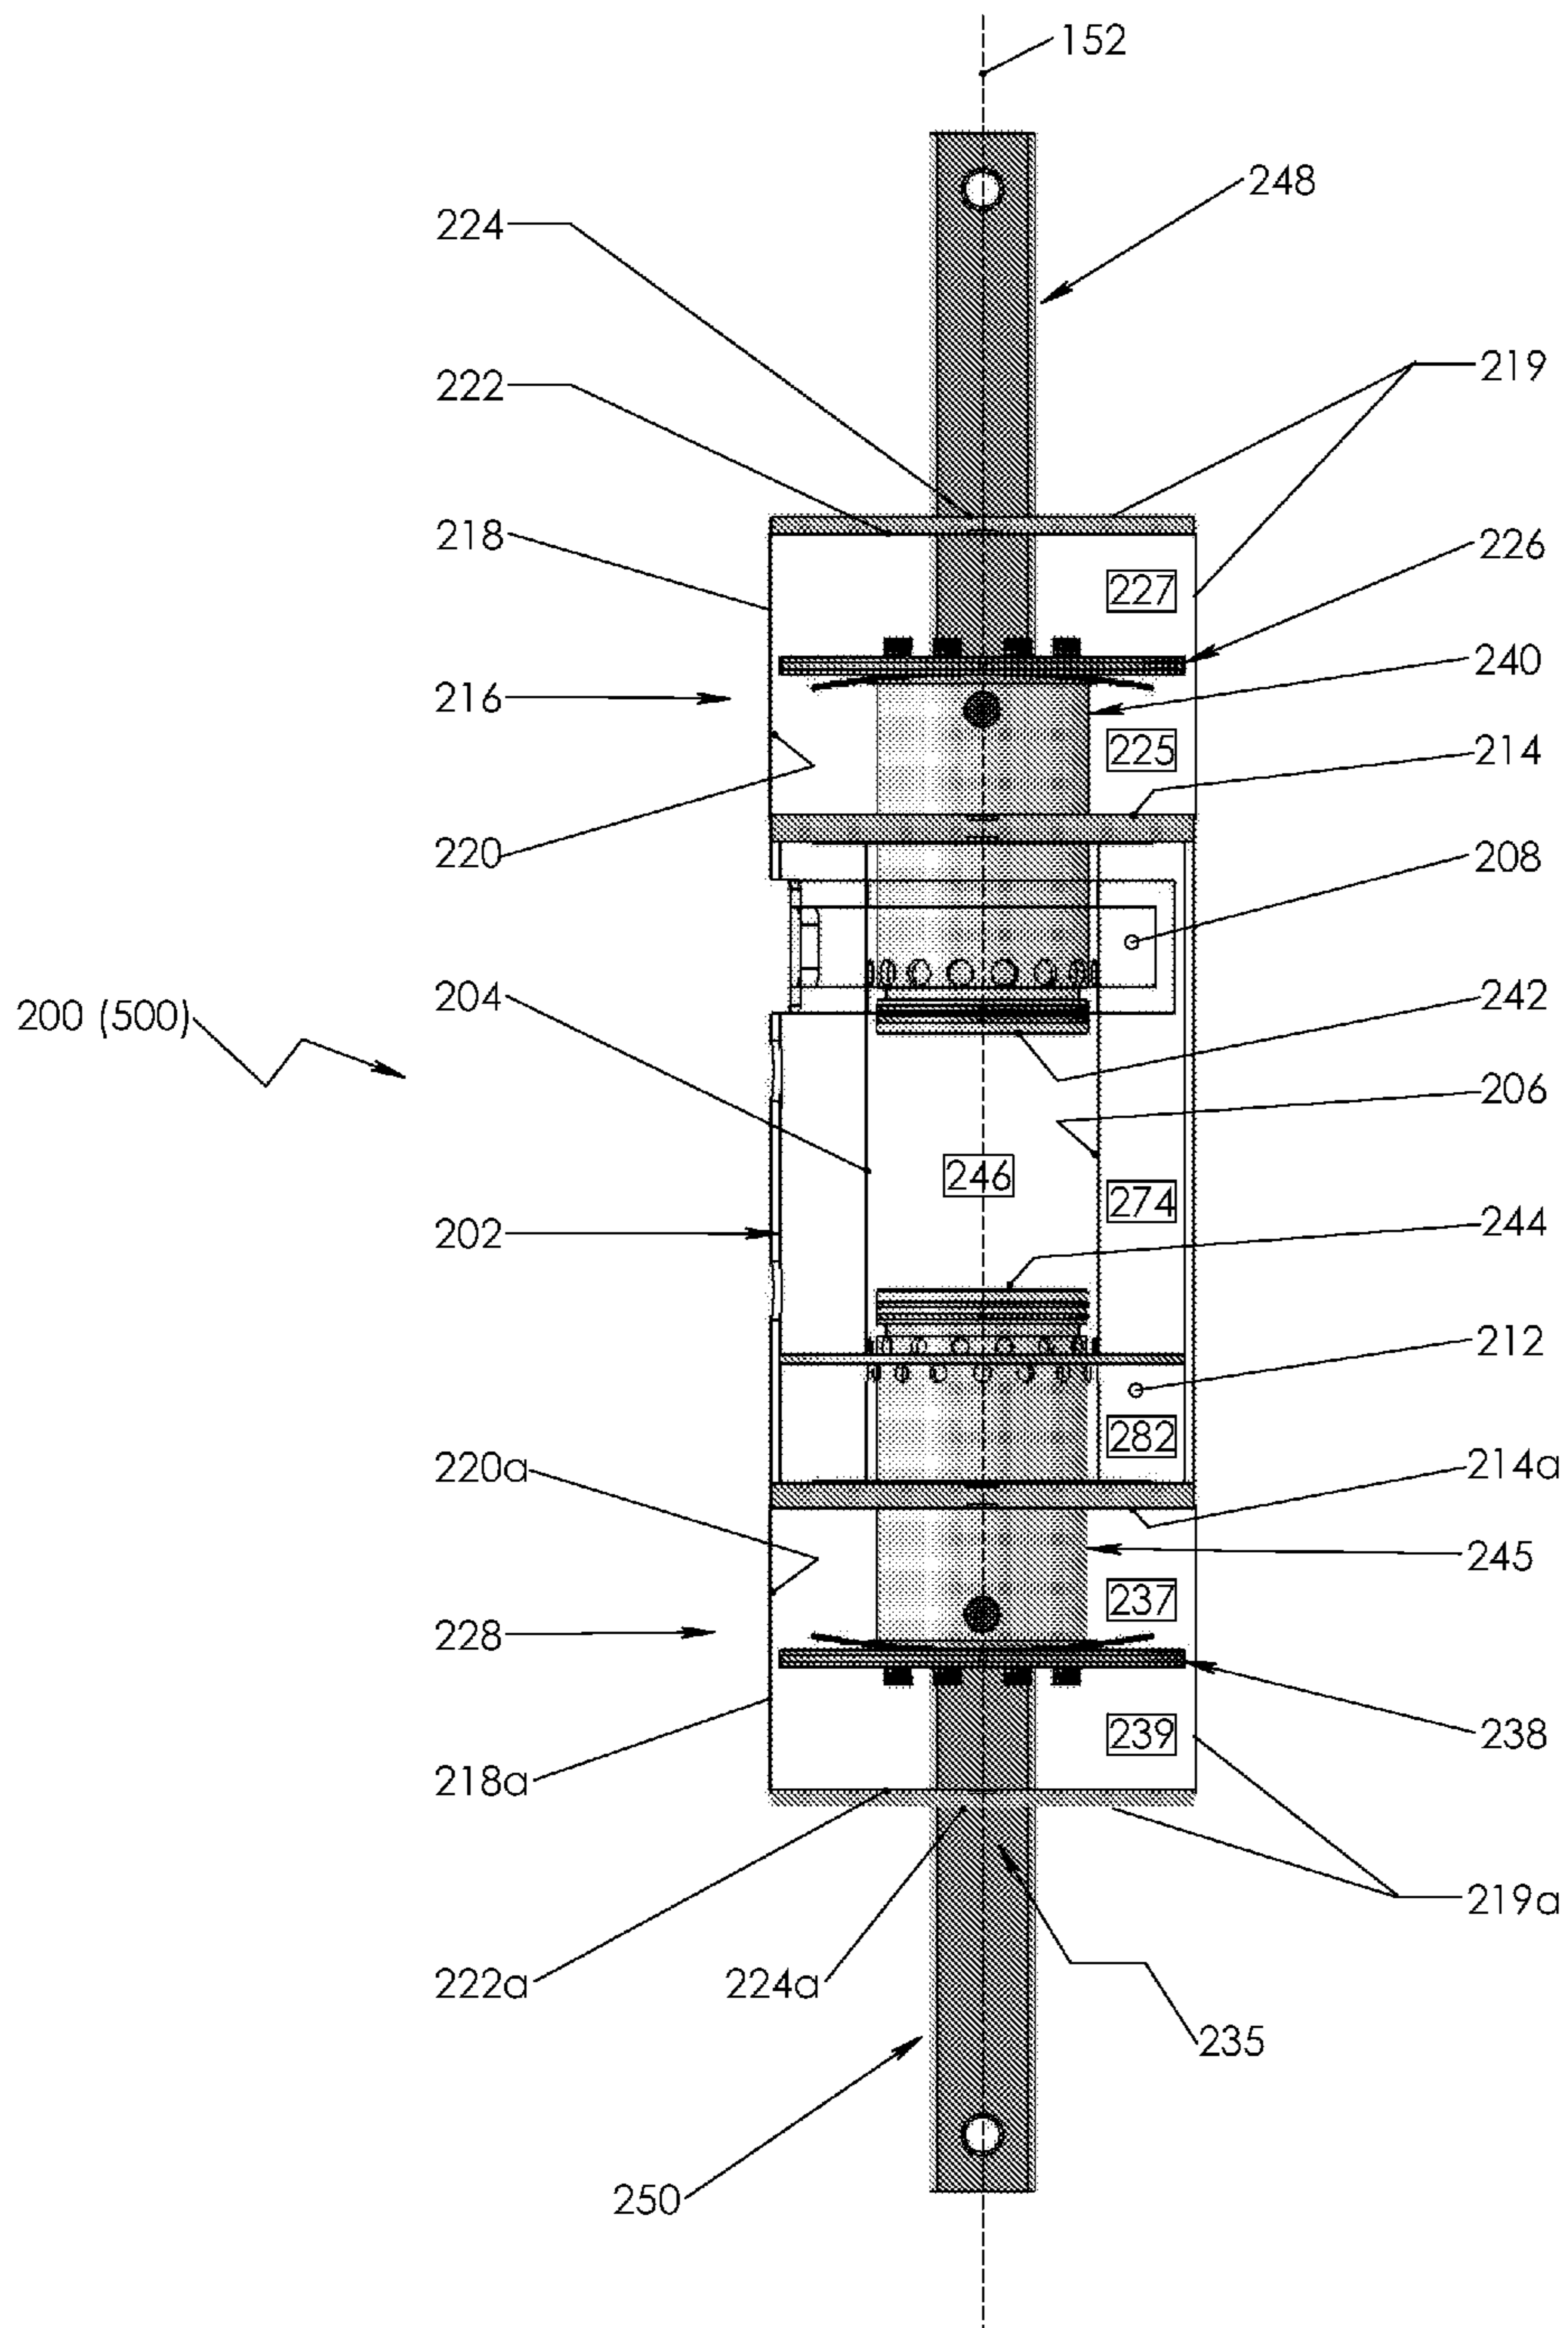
COMBUSTION PISTON ASSEMBLY
